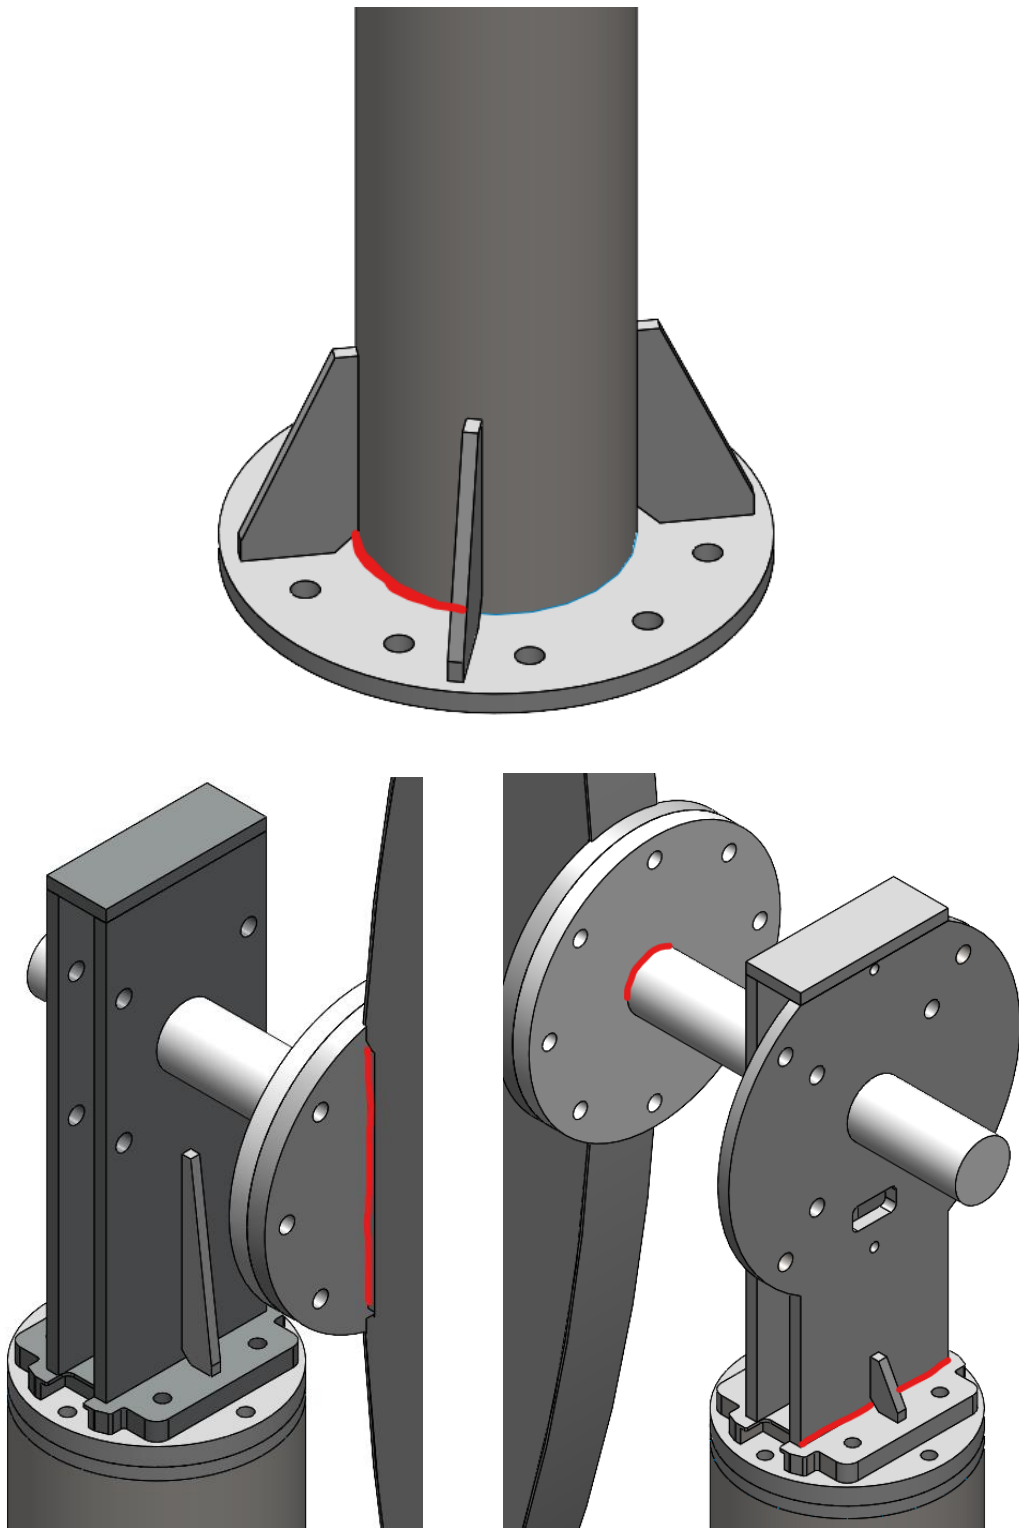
Welded details that are the most critical for fatigue crack initiation. Possible crack initiation location is presented with the red line. In the posts and in the shaft carrier the upper weld toes are critical, in the shafts both weld toes are examined and, in the ring, the lower weld toe is critical.
